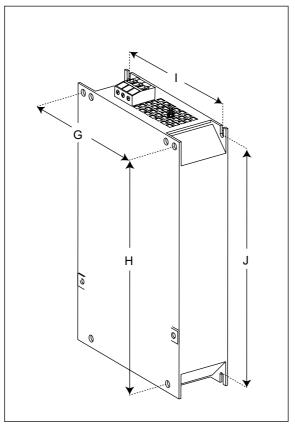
Mounting dimensions of line reactor, frame sizes FSB and FSC
